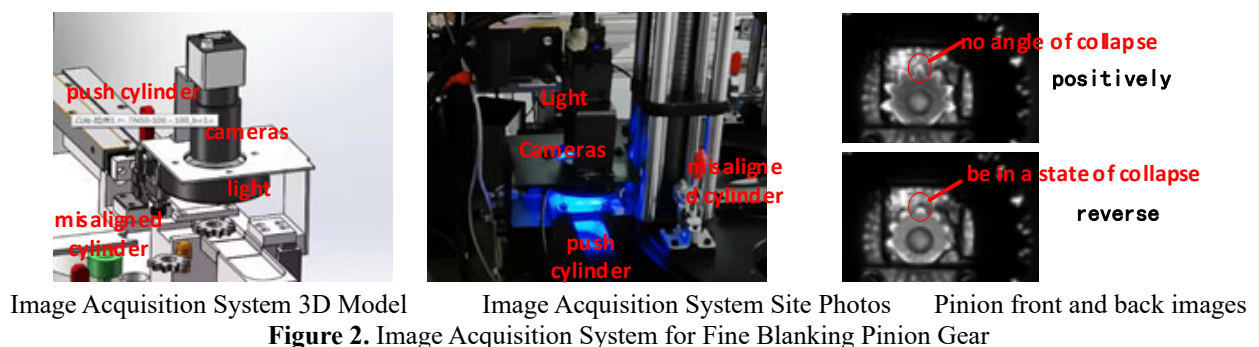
Image Acquisition System for Fine Blanking Pinion Gear
